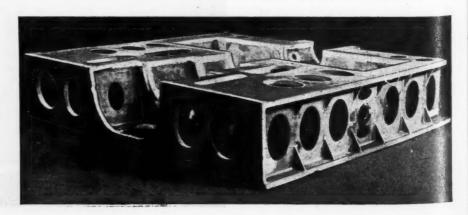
Welded Sub-assembly Designed with a View to Making All Welding Locations Readily Accessible to the Operator
